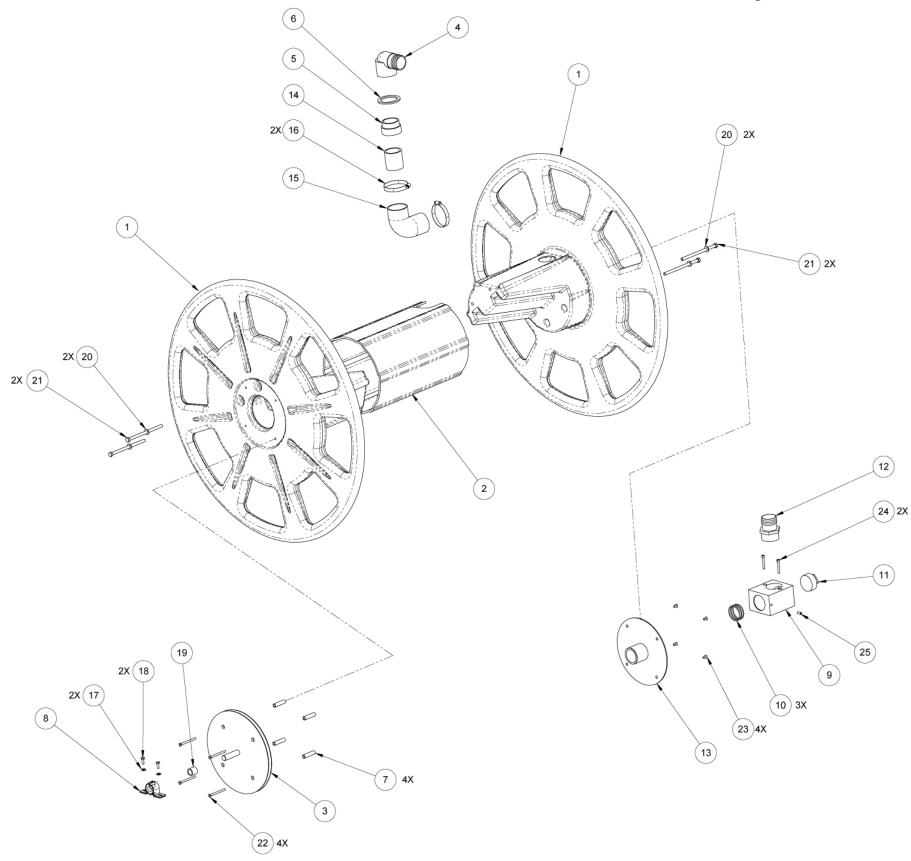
Vacuum Hose Reel Assembly - Parts View 7581 Rev. A
